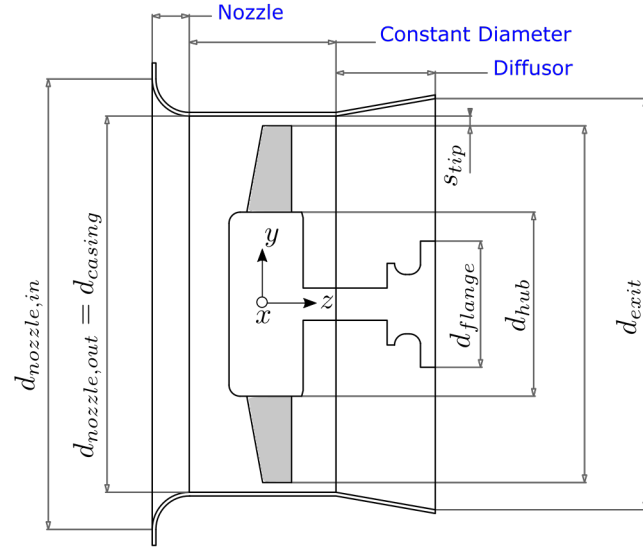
Low-pressure axial fan housed inside casing, designed by FAU [29, 31].
